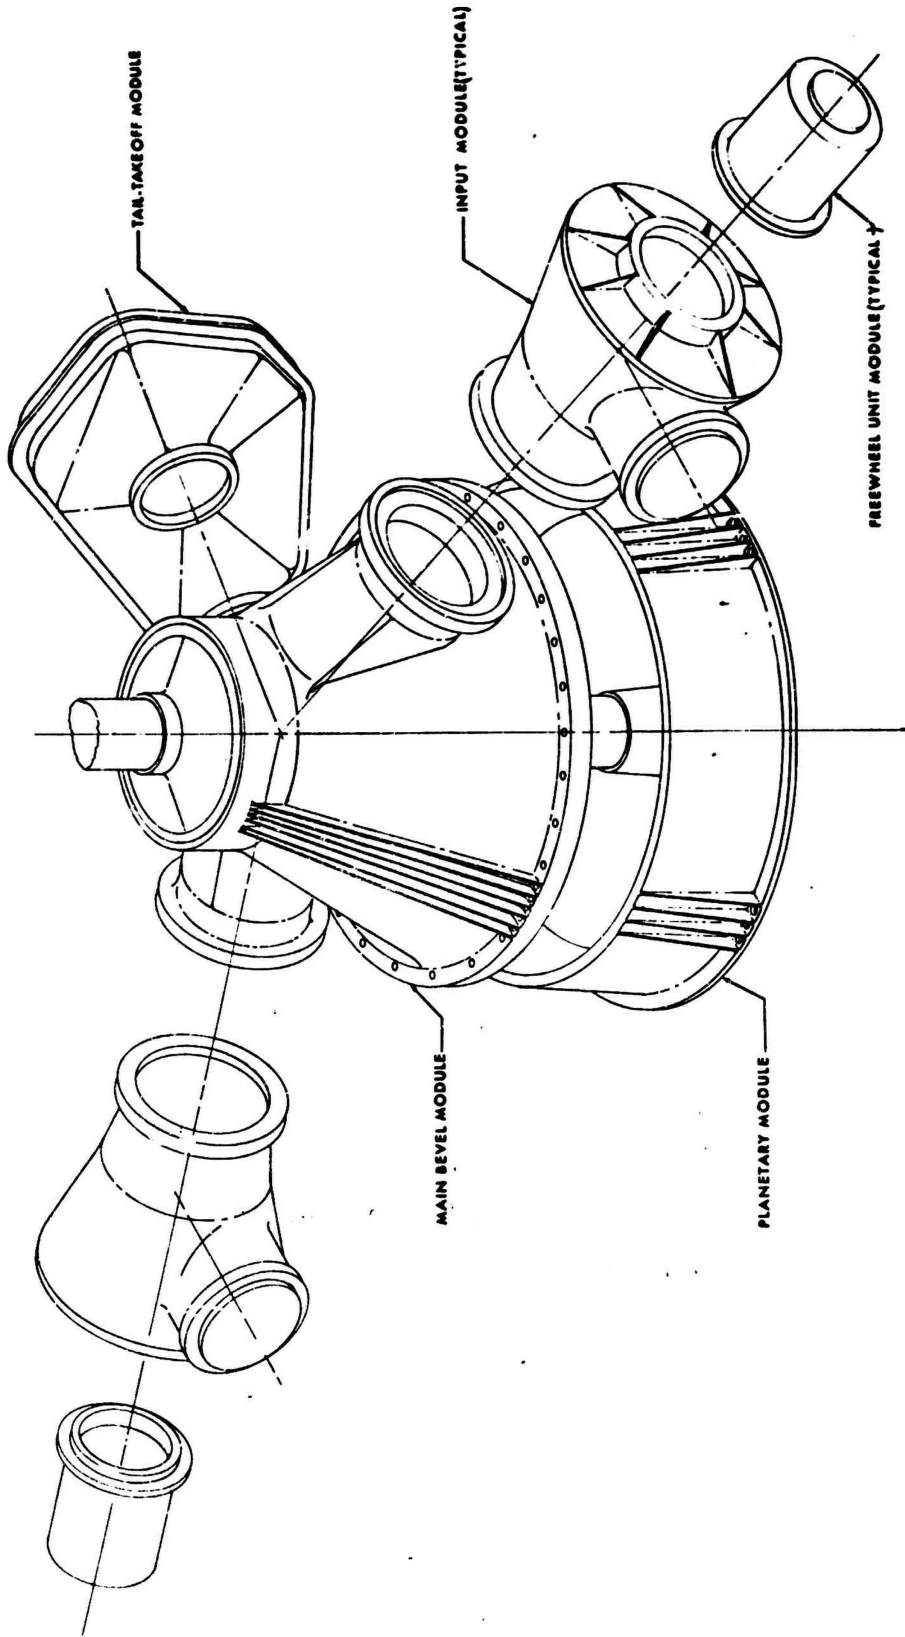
Exploded Isometric Drawing of CH-54B Main Transmission, Seven-Module Configuration.
